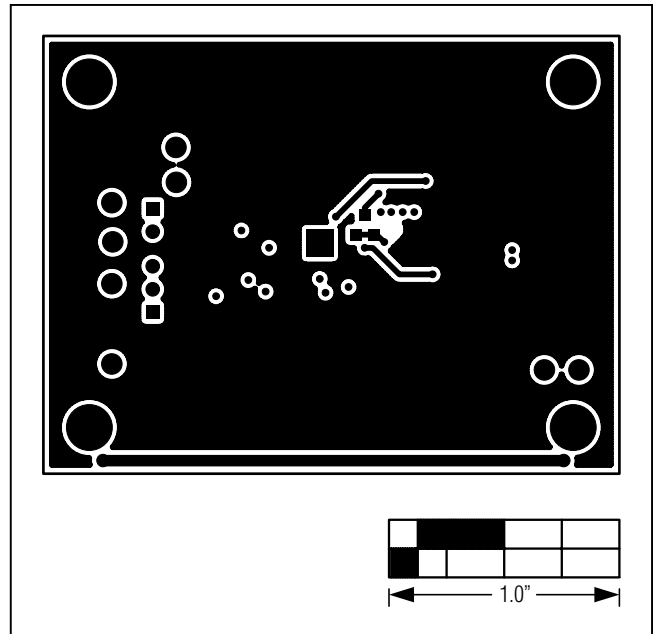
MAX16952 EV Kit PCB Layout—Solder Side
